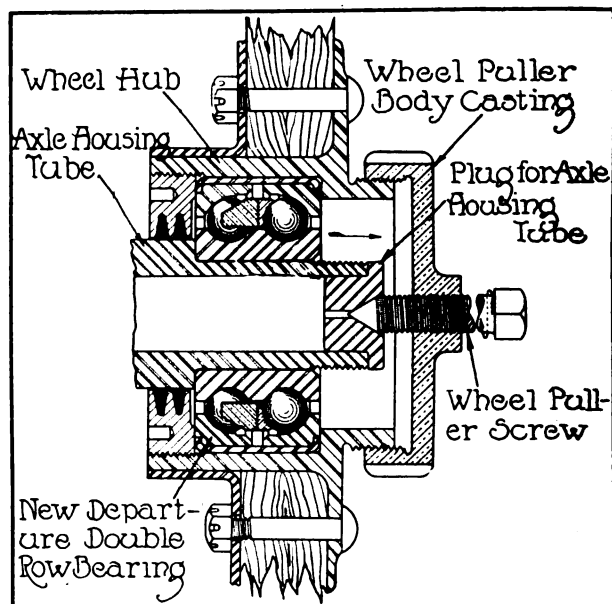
Hub Wheel Puller for Removing Wheel and Bearing from Shaft or Axle Tube.
